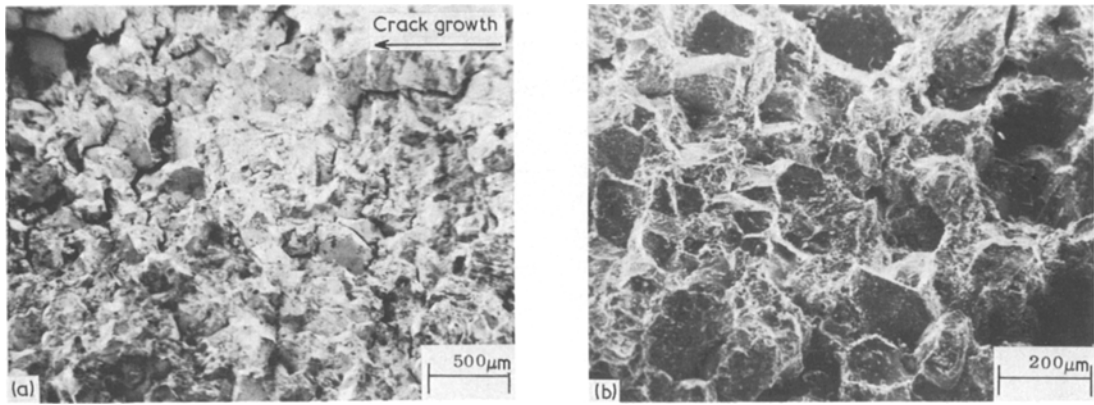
Fracture surfaces of specimens tested at 16 kN under (a) cyclic load with 1 min hold, (b) static load.
